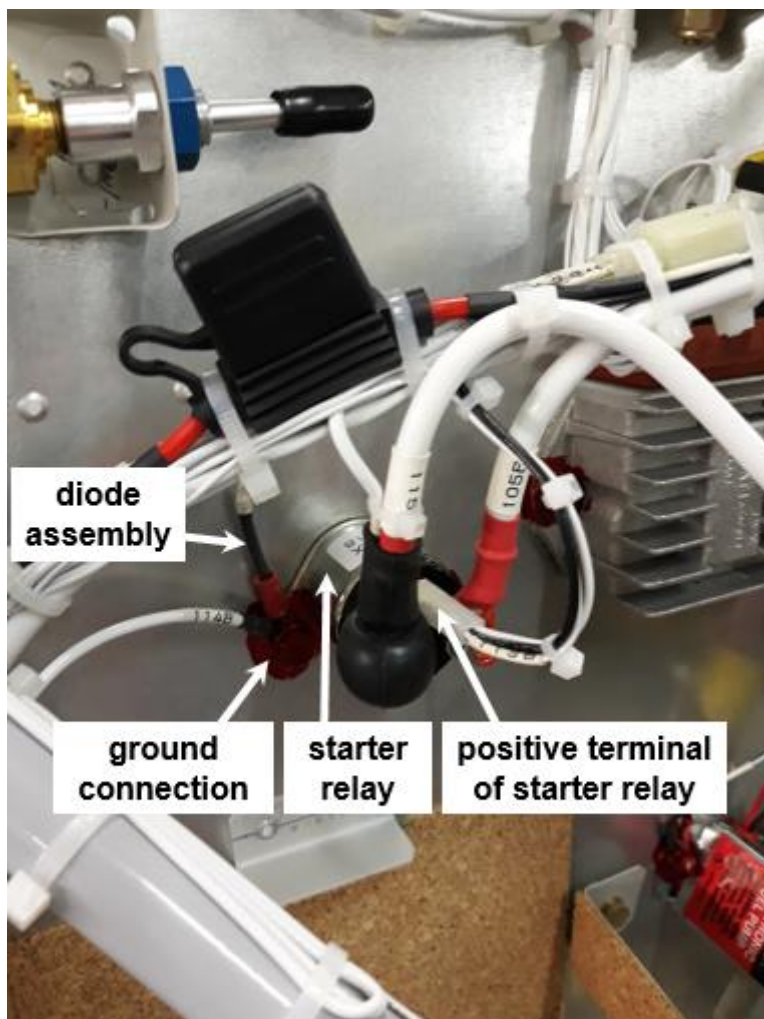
Diode assembly installed on PS-28 Cruiser airplane
